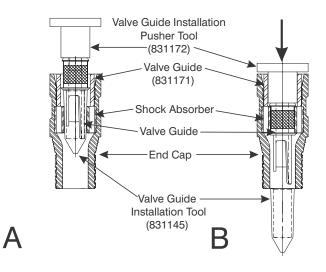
Press Valve Guide into End Cap and Shock Absorber.
